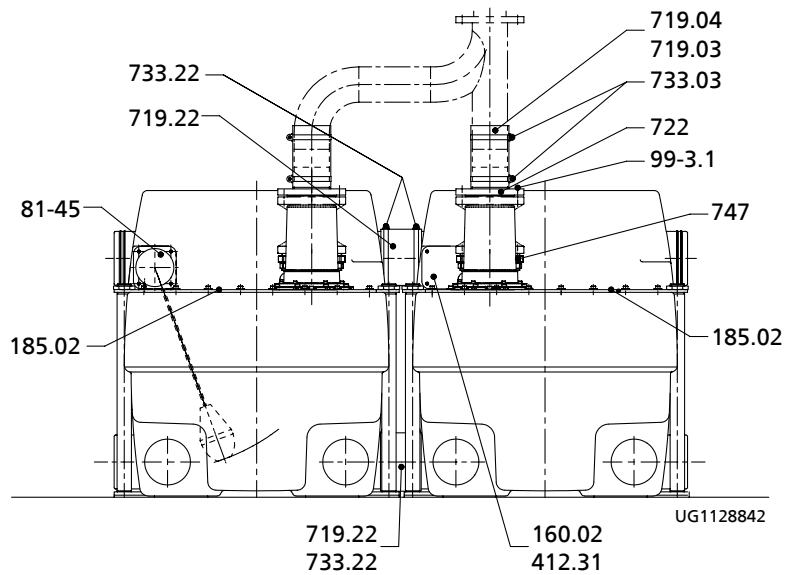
Generally assembly drawing of Compacta UZ900 with 2 tanks
